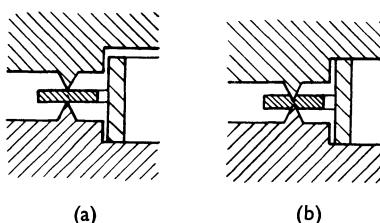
General layout of a knife-edge seal: (a) open; (b) closed
